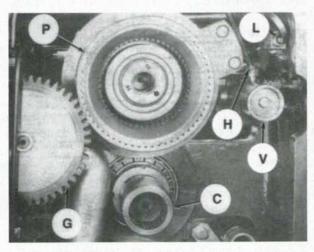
Pto clutch assembly is located in front of rear axle center housing.
